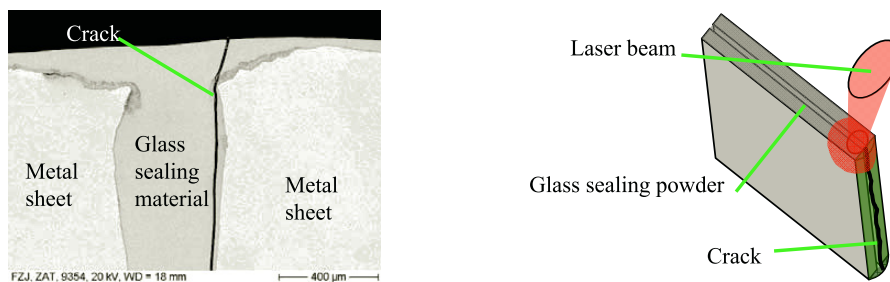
Cracks in the glass bead a) Crack, b) Inducing of cracks
